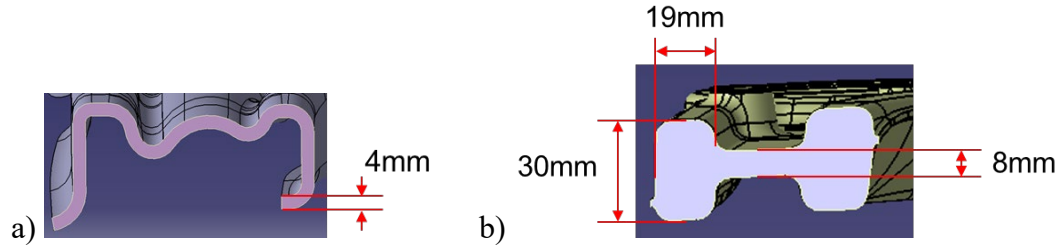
Cross section of the LCA between the hoop bushing and ball joint for the a) stamped steel construction and b) cast aluminum construction.
